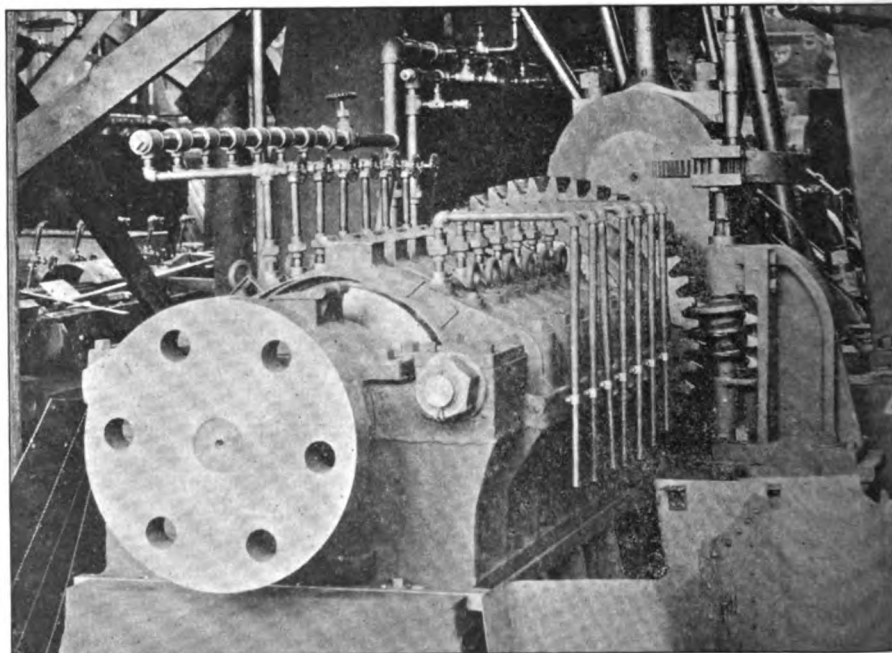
HORSESHOE TYPE WATER-COOLED THRUST BLOCK USED ON ENGINES FOR THE EMERGENCY FLEET CORPORATION
